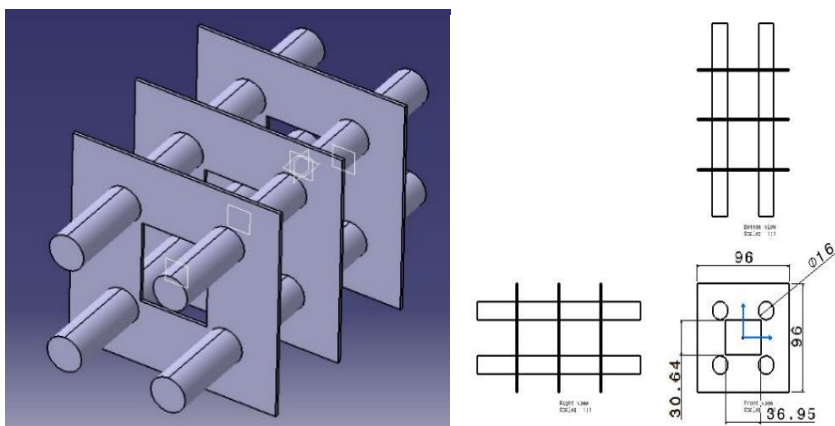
3D Model Tube and Finned Type Heat Exchanger with rectangular cutout
